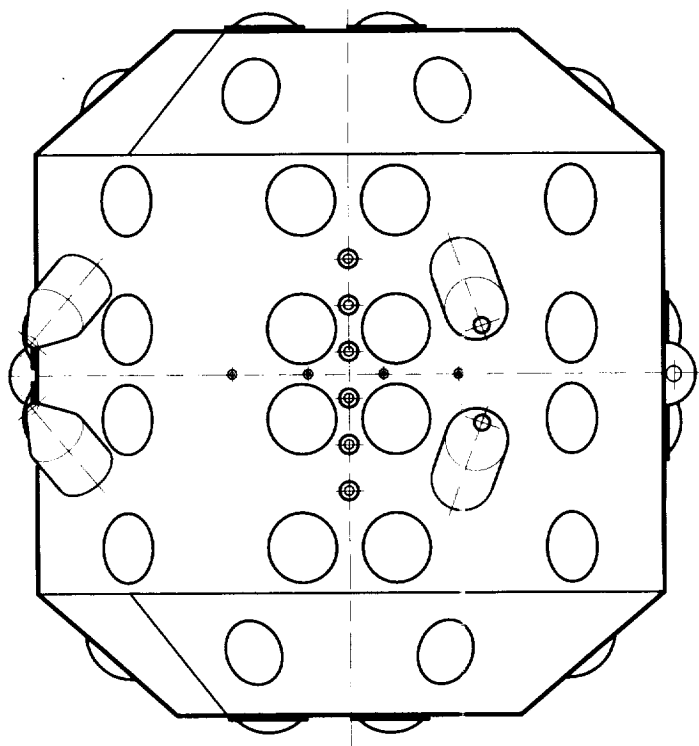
Small receiver tank multilayer insulation (MLI) blanket.
